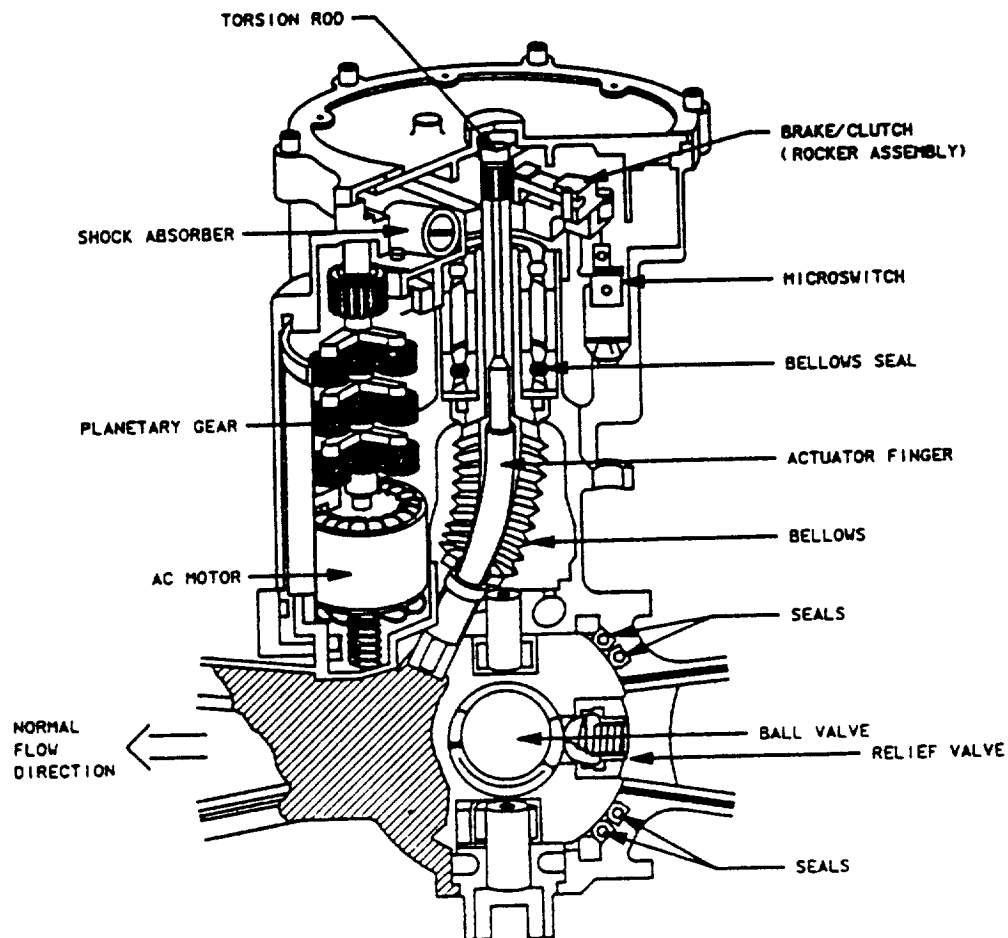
TANK AND CROSSFEED ISOLATION VALVE
